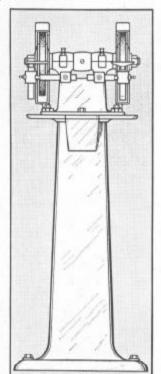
Grinder Mounted on Heavy Cast Iron Pedestal.
